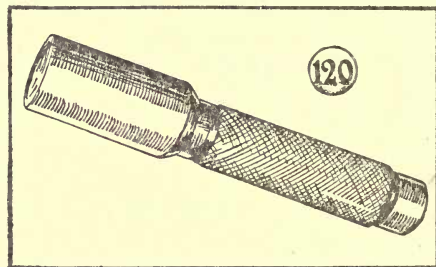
Tool for driving roller bearing sleeve on propeller shaft
